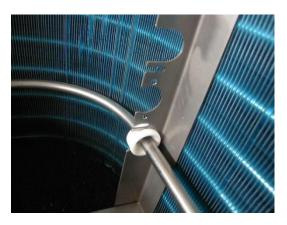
Figure 43 Step 6: Snap in the insulated ring of the electric heater to the electric heater mounting shown above.
